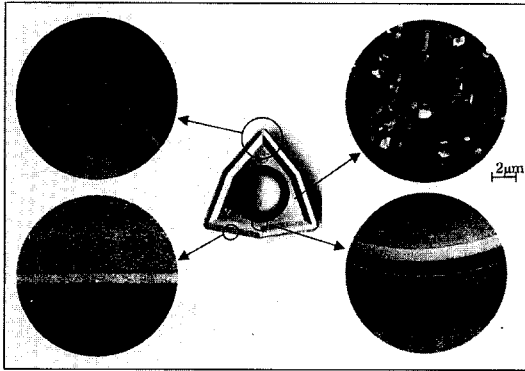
Pictures showing the macro shape of a sintered insert and the magnified shape of important position.
